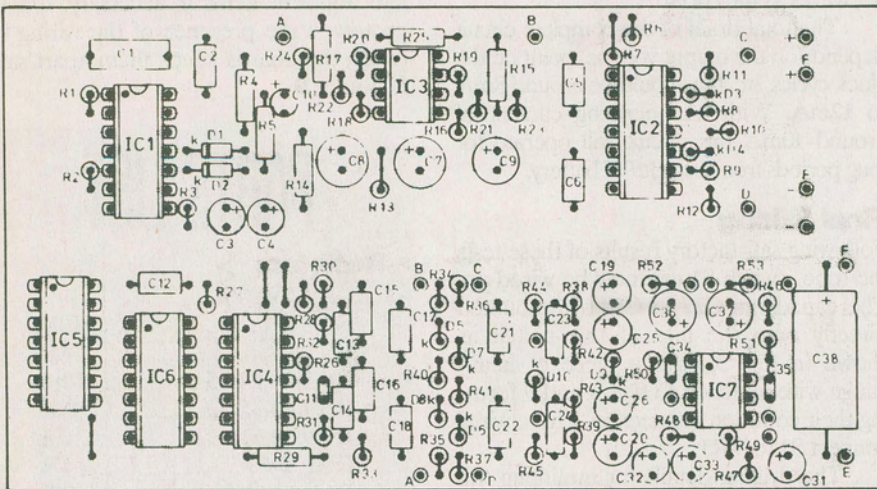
The PCB and component layout. This board is cut in half if using the case specified.
